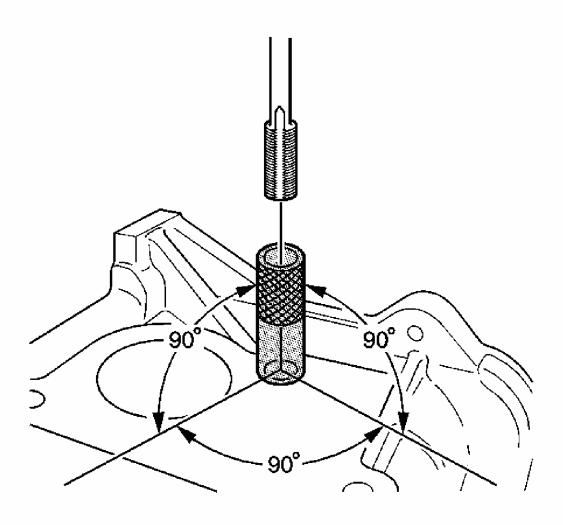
View Of Tapping Guide Courtesy of GENERAL MOTORS CORP.
